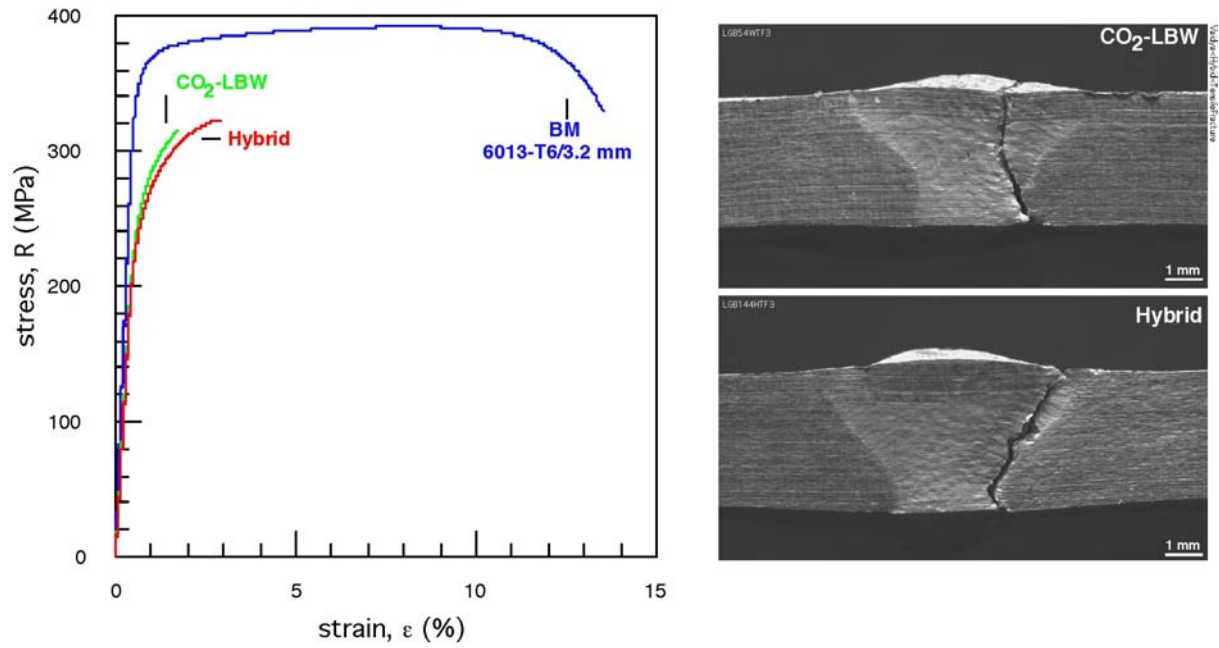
Tensile curves (gauge length  $L_0 = 50$  mm) and the fracture location in the  $\text{CO}_2$  laser beam weld and the hybrid weld in a 3.2 mm thick AA6013 sheet butt-welded in T6. The fracture location is restricted to the weld.
